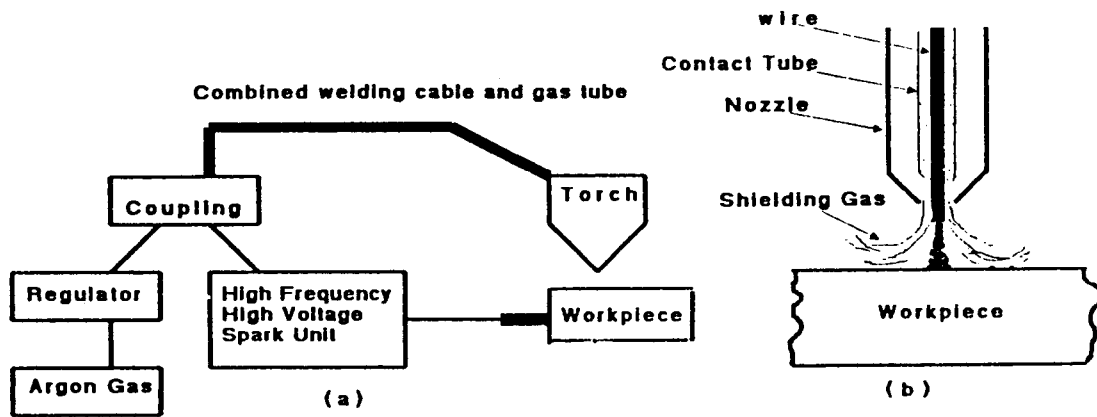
(a) Setup of TIG welding; (b) torch-work contact of argon arc welding.
